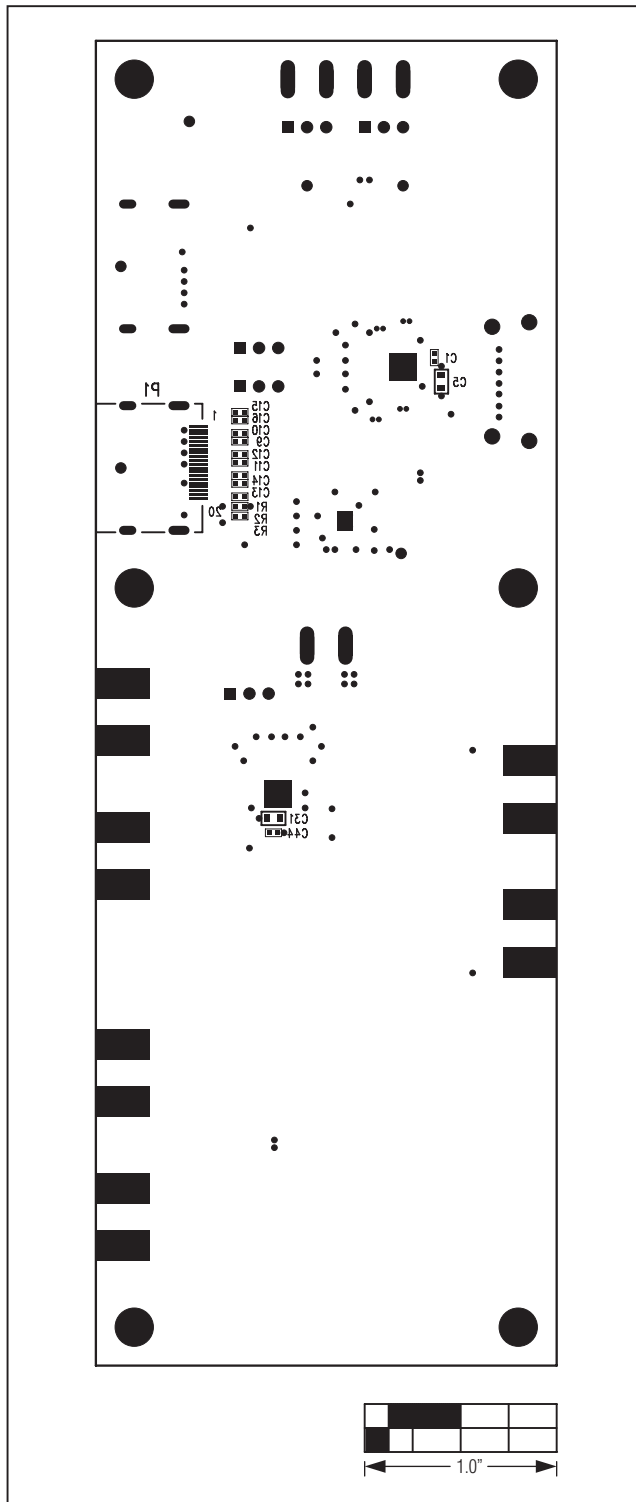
MAX14886 EV Kit Component Placement Guide—Solder Side
